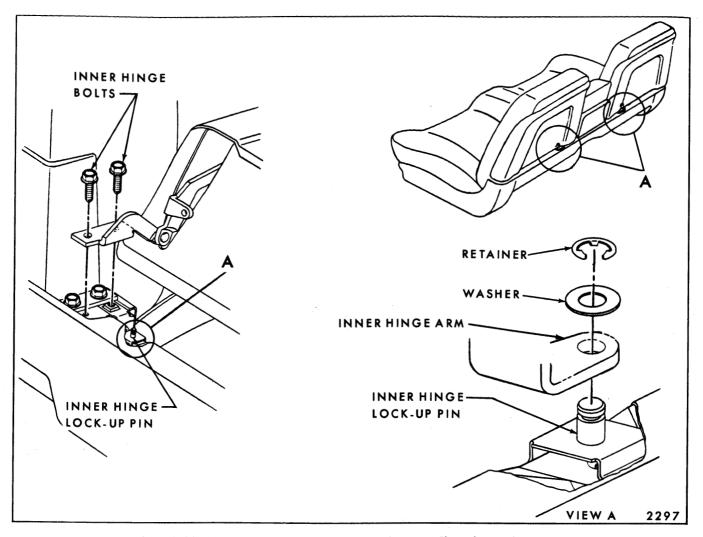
Strato Full Width Seat Back Attachment - Chevrolet 16639 Style
